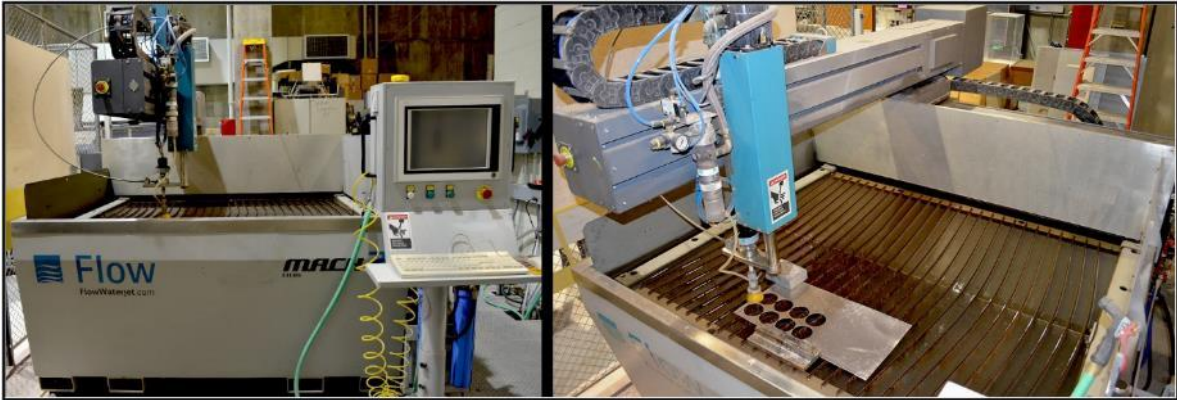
RPI AWJ Machine Front (Left) and Overhead showing sheet-metal work-piece (Right)
